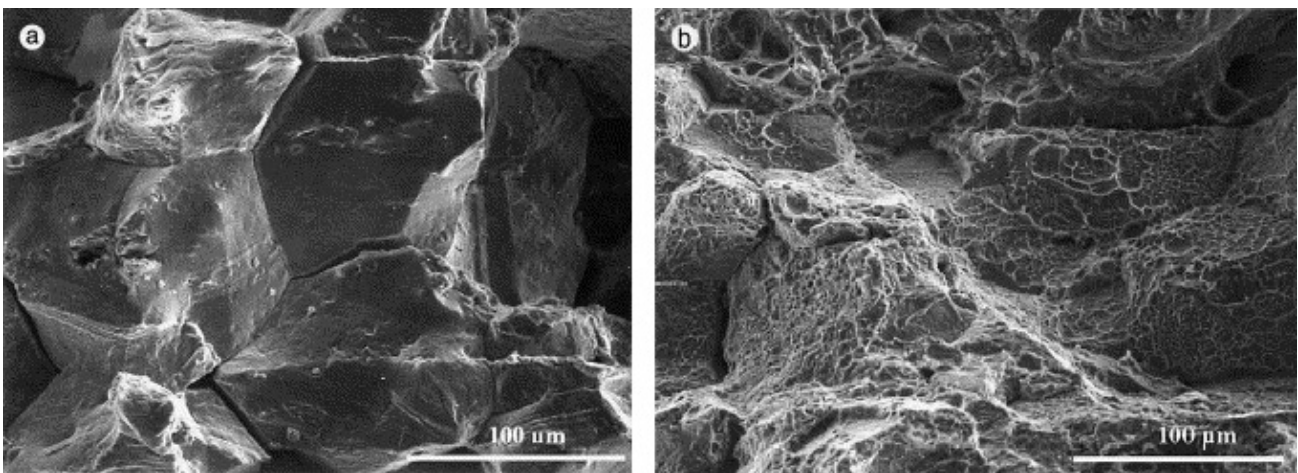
Stress relief cracking fracture surfaces of 15% pre-strained 321 steel CT specimens tested at 600°C: (a) unaged state; (b) aged state (Chabaud-Reytier et al., 2003).
